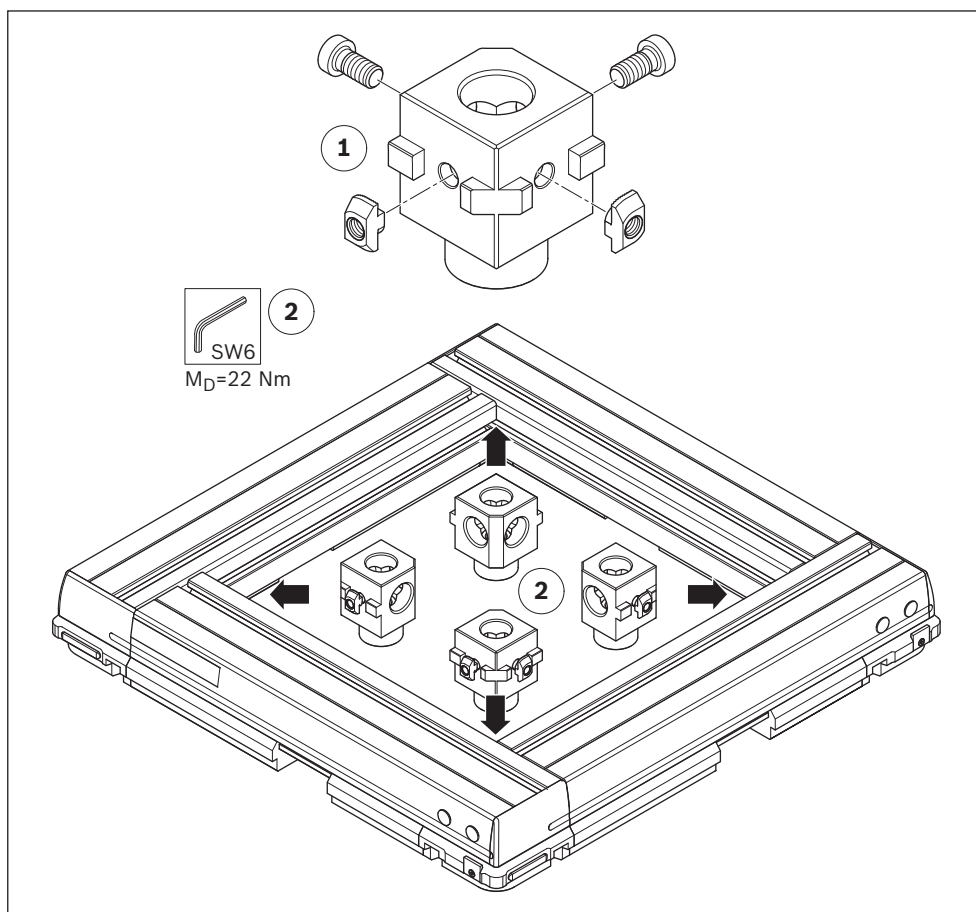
Workpiece pallet WT 2/F-H: Assemble the positioning bushings
